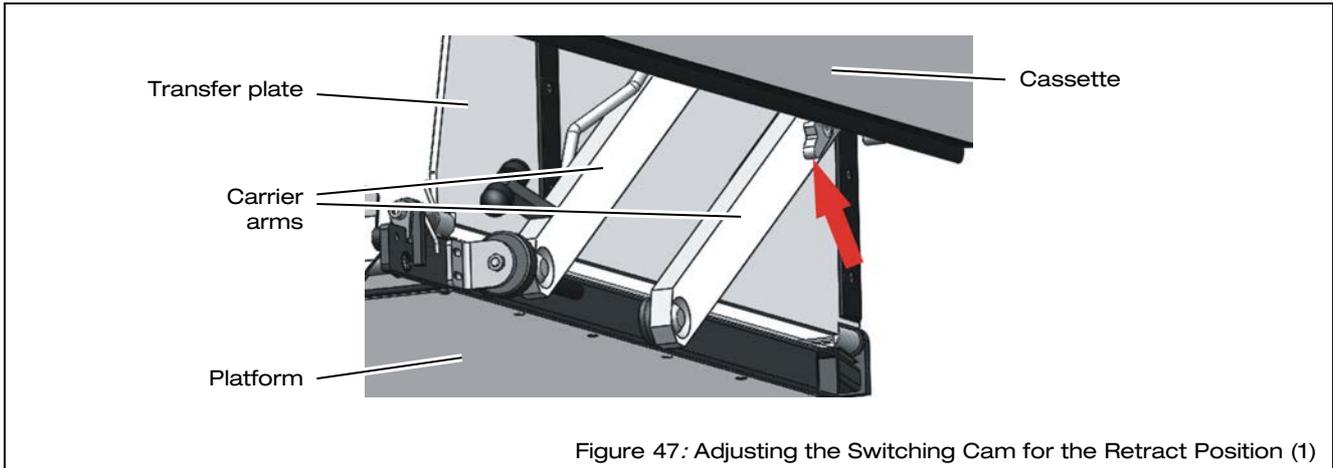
Adjusting the Switching Cam for the Retract Position (1)
